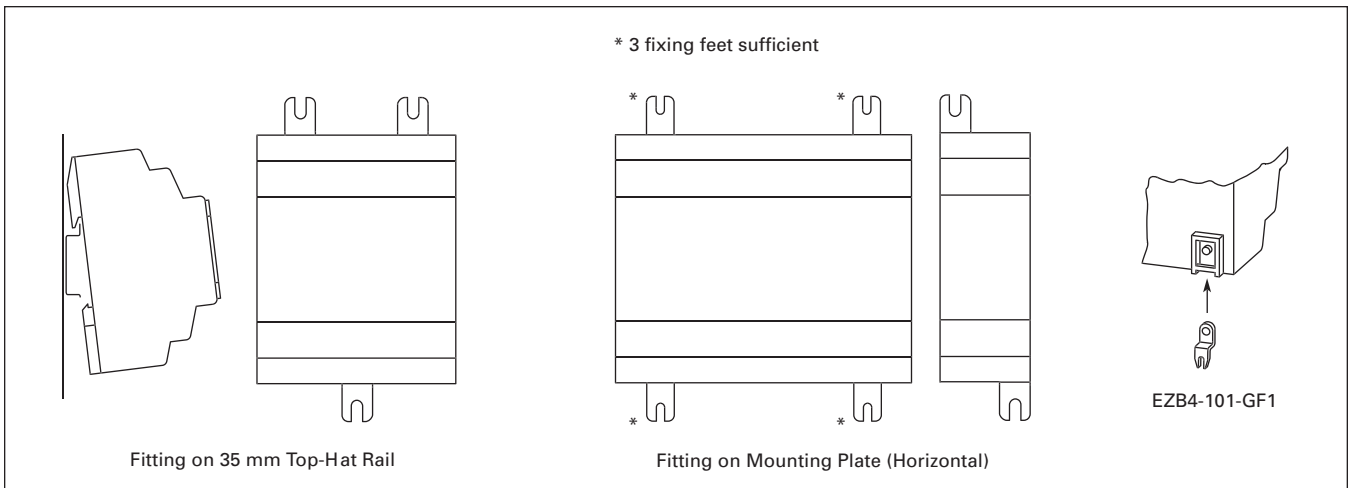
EZ202-RE/EZ200-EZ/EZ205-ASI Series Dimensions in Inches (mm), Drawing Number MD05013012E
